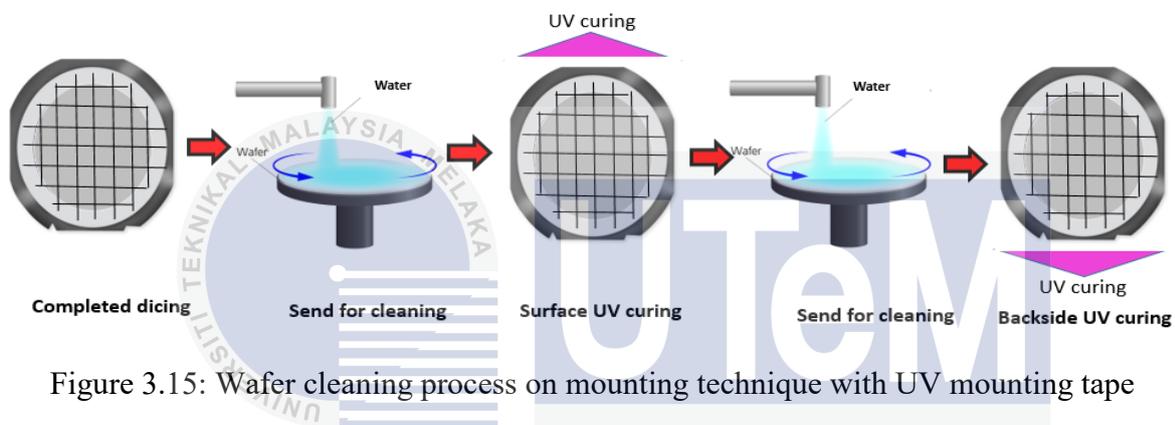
Wafer cleaning process on mounting technique with UV mounting tape
